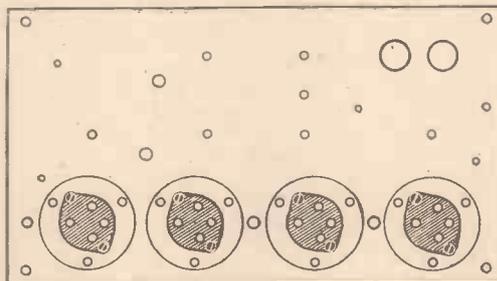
Four combined rings and sockets mounted on a chassis.
